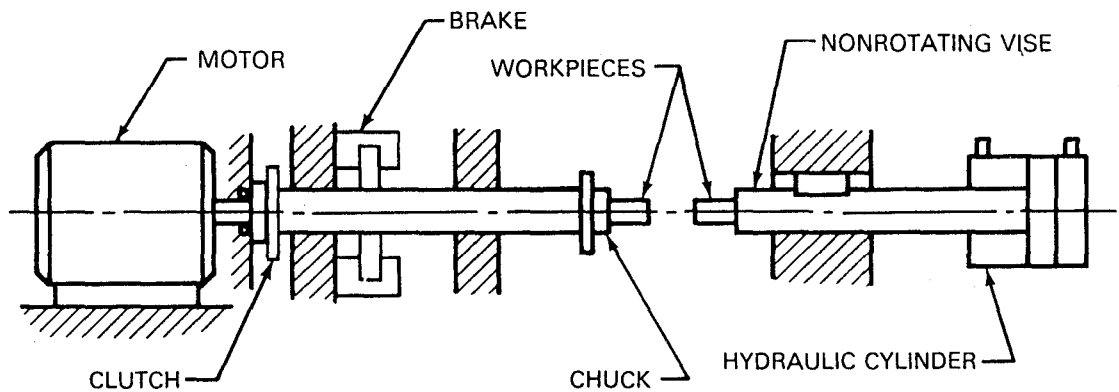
Basic Arrangement of a Direct Drive Welding Machine
